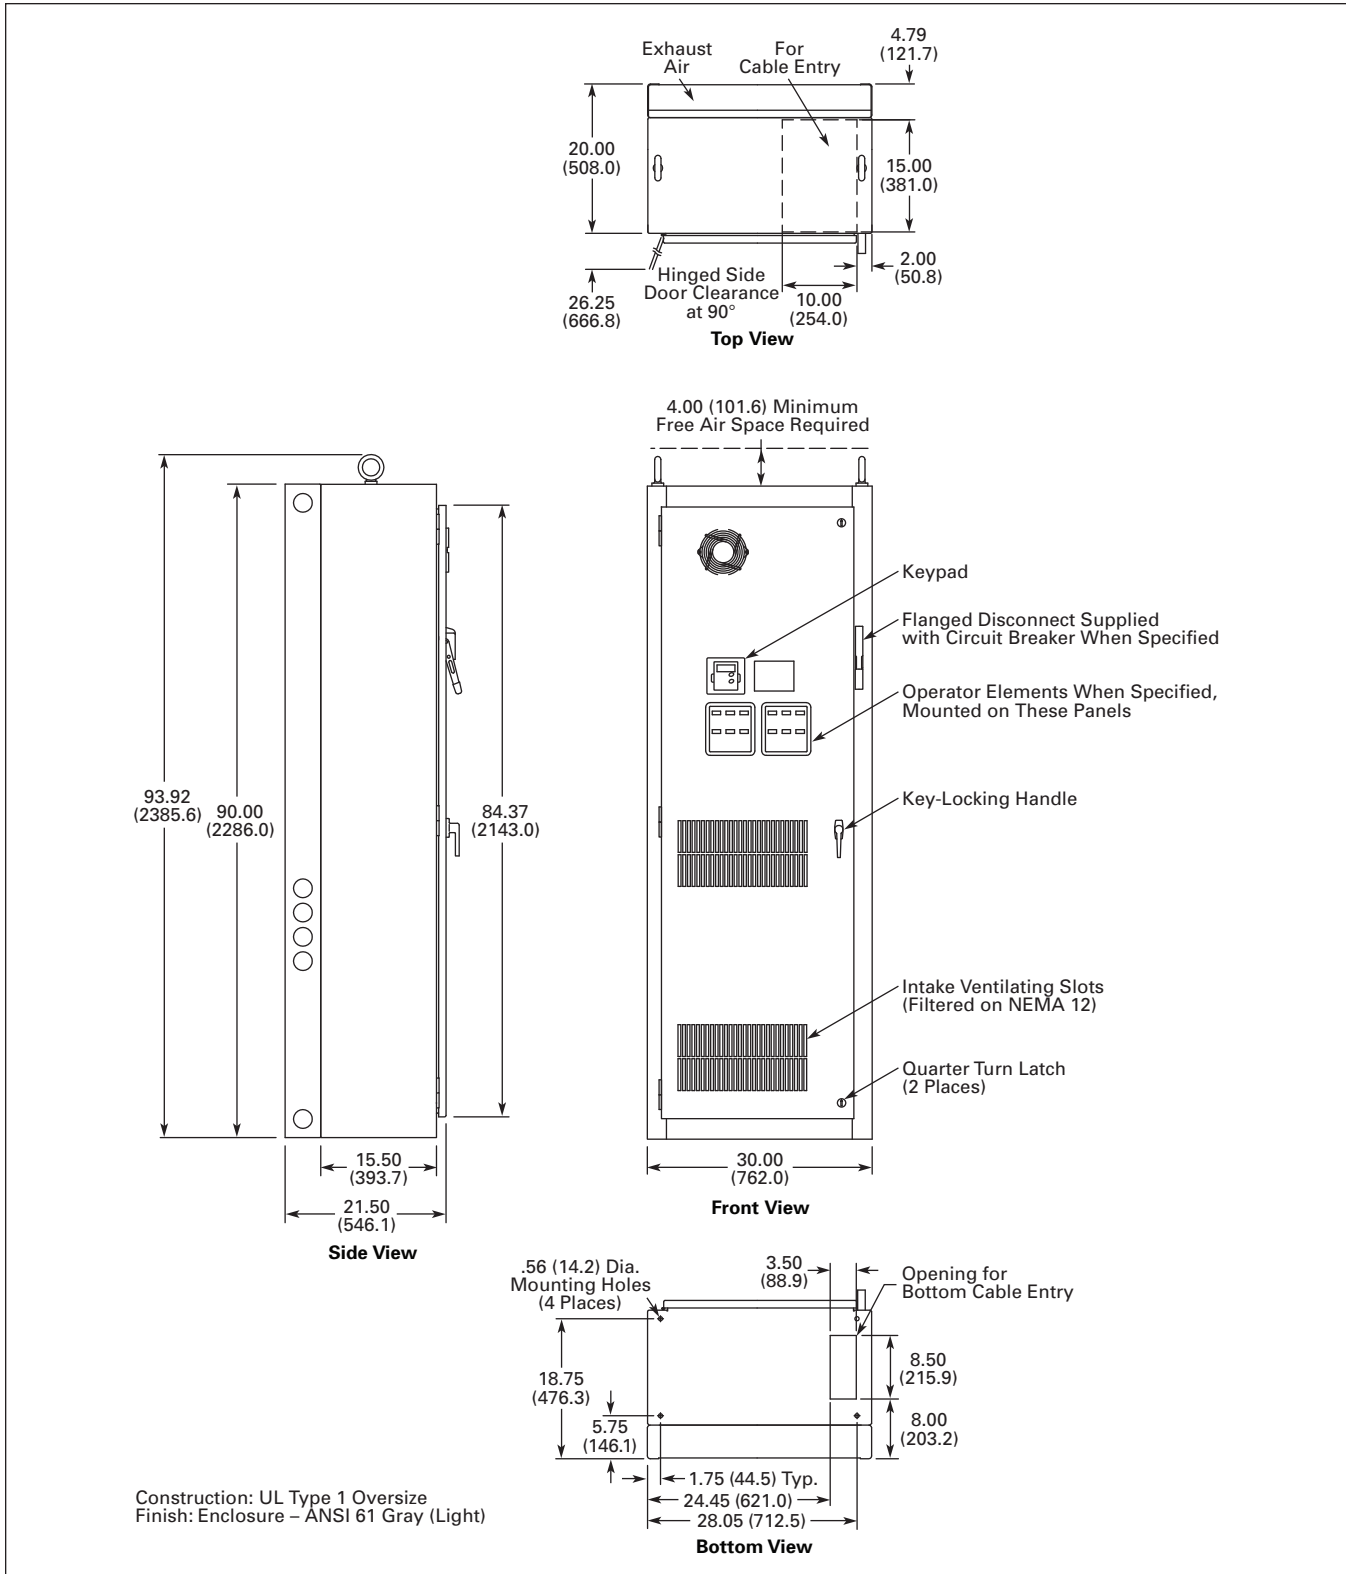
25 – 150 hp I_L and 25 – 125 hp I_H 480V, 25 – 100 hp I_L and 25 – 75 hp I_H 575V — Approximate Dimensions in Inches (mm)
